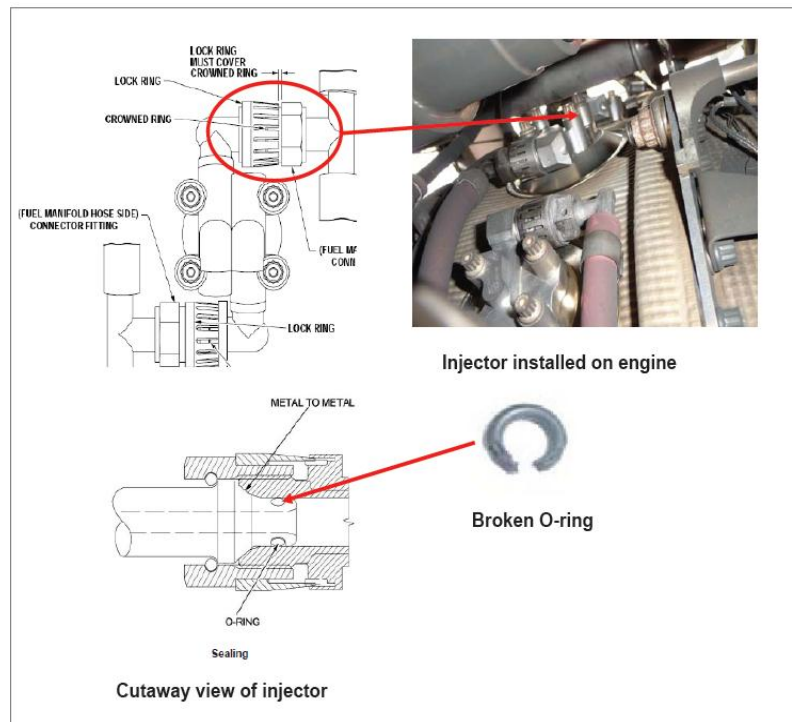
The Sample of Broken Pre-formed packing (O-Ring)
